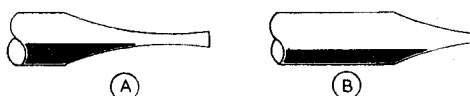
Showing effect of too much and too little projection of the blade when grinding
